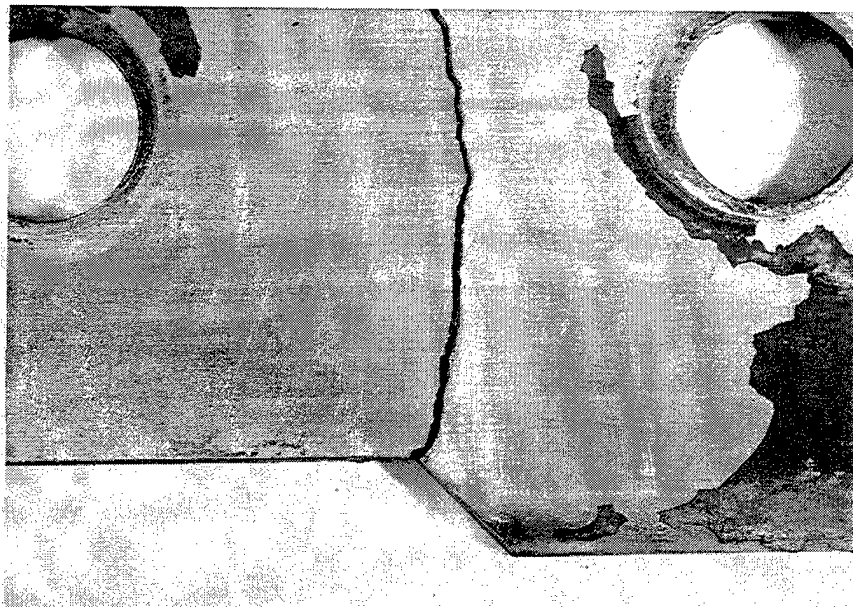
A close-up view of the machined angular notch with a sharp corner that acted as a stress raiser where the crack initiated. Same angle as in Figure 2. Magnification: 1 1/3x.
